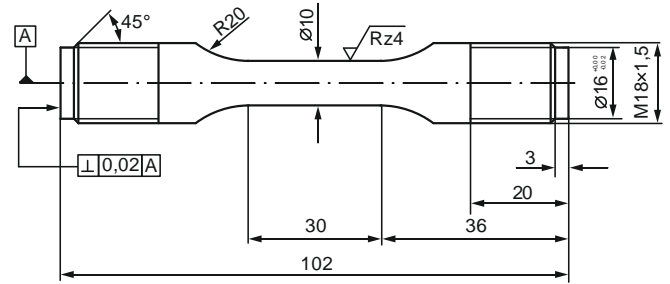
Drawing of the test specimen (geometry and dimensions in mm)
